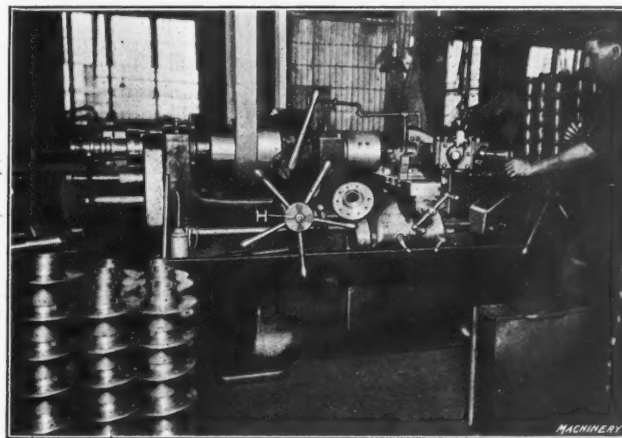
No. 9 Bardons & Oliver Turret Lathe used for machining Automobile Wheel Hubs
